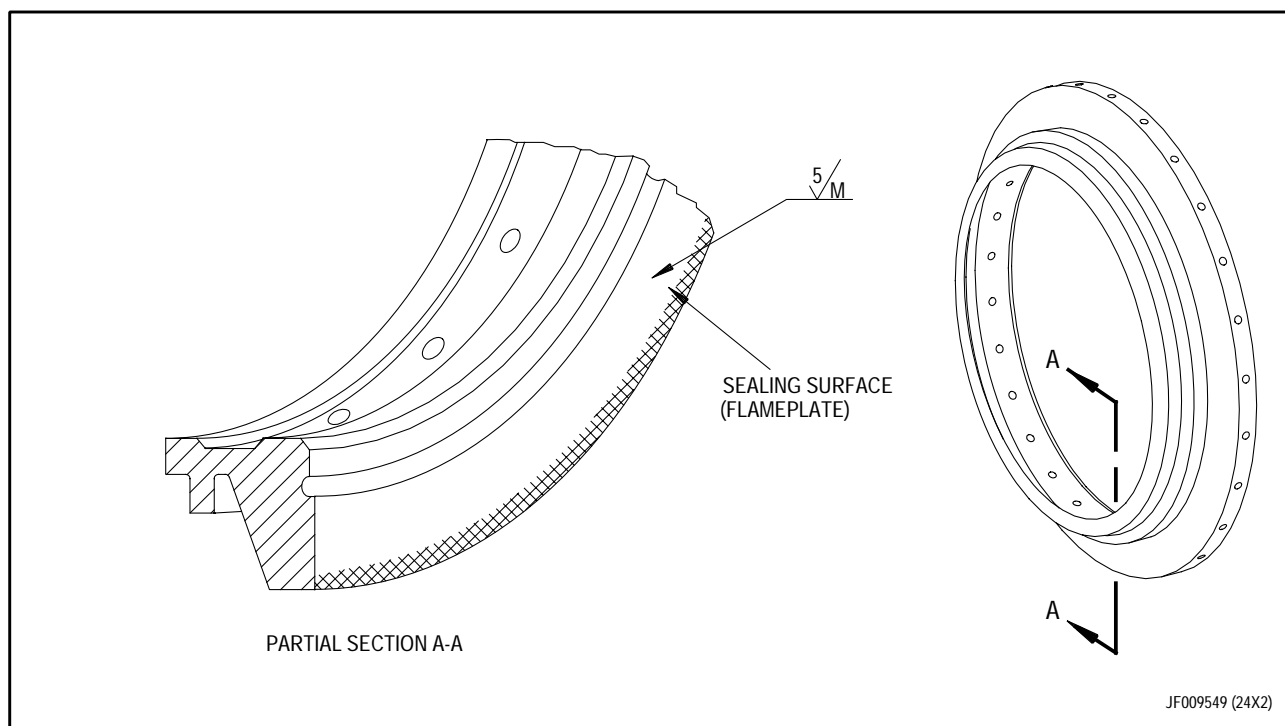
No. 1 Bearing Seal Seat - Lapping Repair
